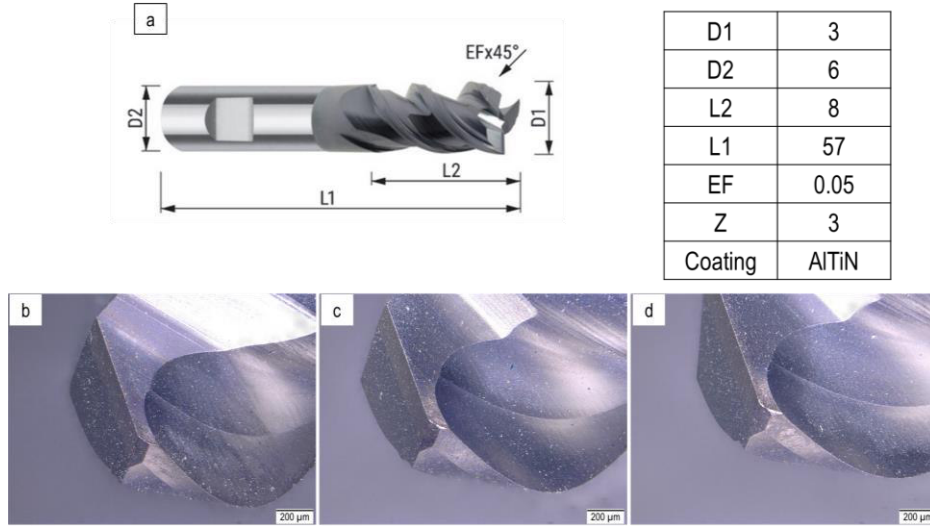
(a) specification of utilized cutting tool (b) edge 1 (c) edge 2 (d) edge 3
